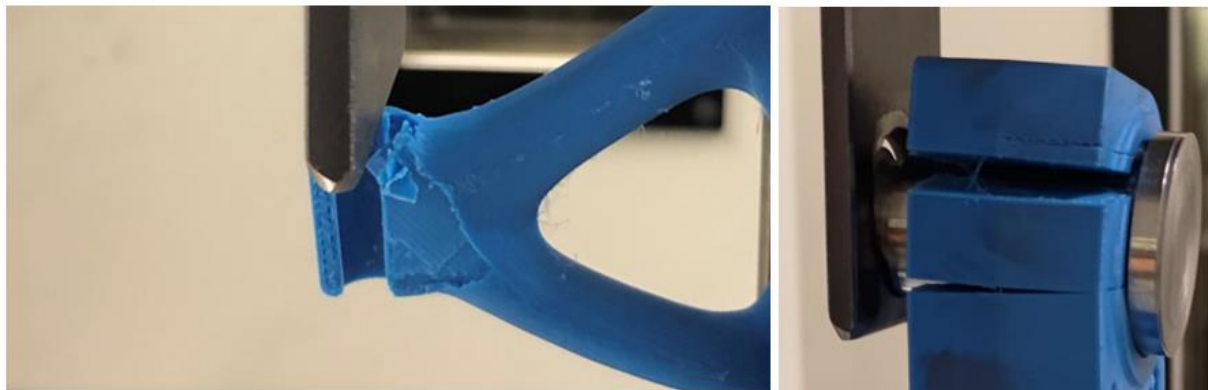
Test fractures, Rocker Arm for 316L (Left), Original Bracket (Right)
